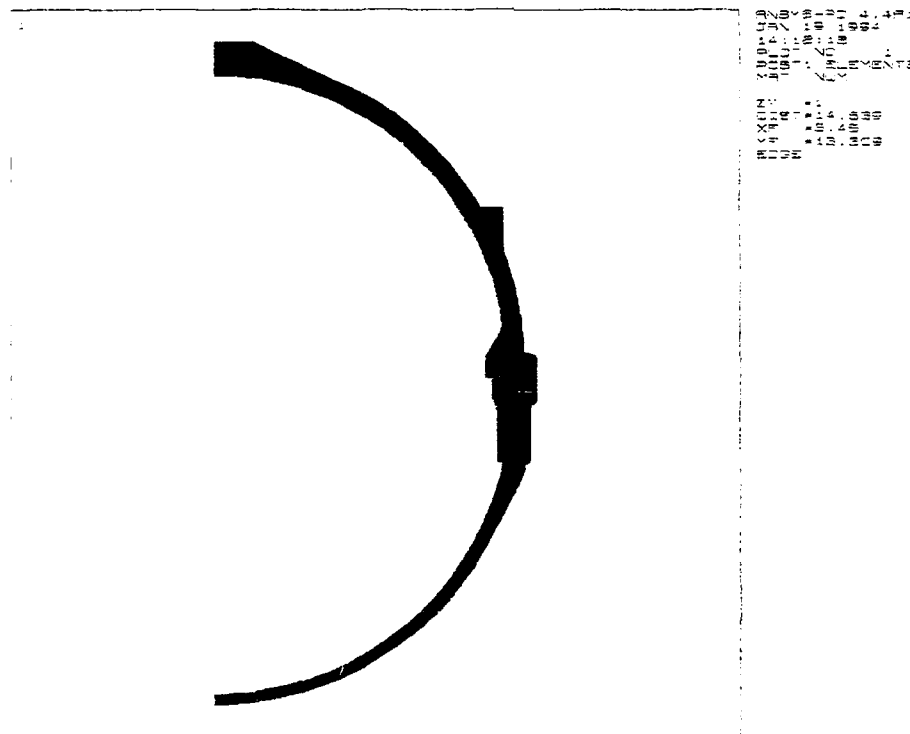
FEA solid model of pressure-test configuration for aft head assembly using a Type 4 alumina hemisphere.
